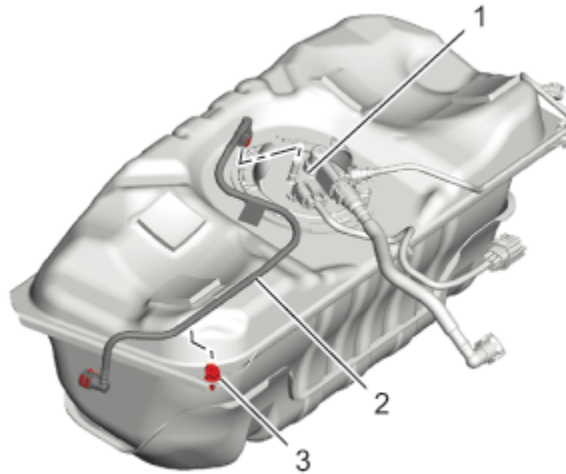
Fuel Tank Fuel Pump Module, Fuel Pump Fuel Feed Hose And Retainer
